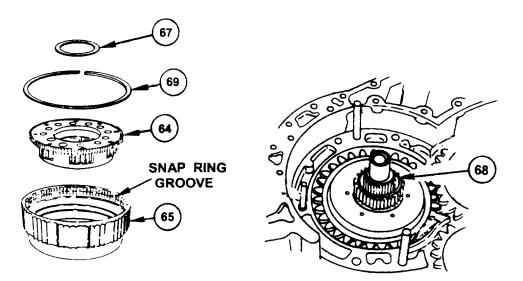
Output Carrier Assembly, Brake Clutch Drum, and RH Steer Driven Gear.
